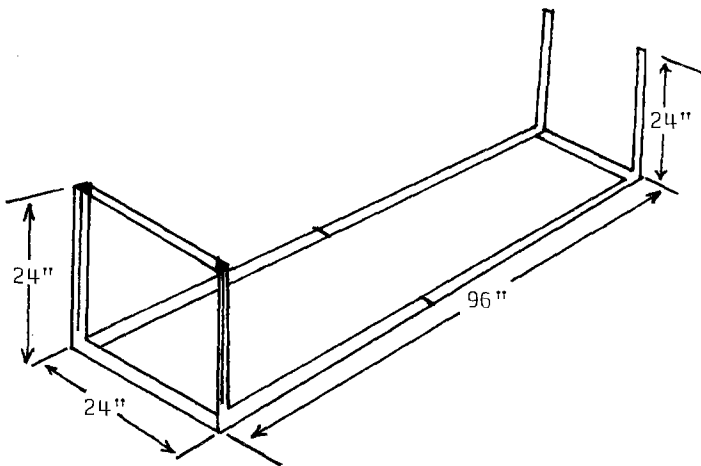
Adjustable support structure. (1 in. = 25.4 mm.)
